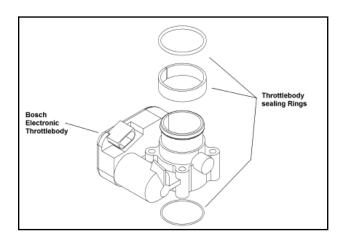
Electronic Throttle control device "Drive by Wire" throttle body assembly"
